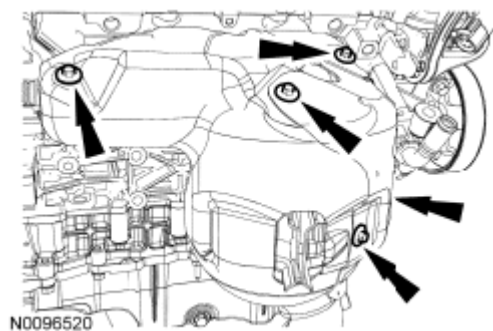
Locating RH Exhaust Heat Shield & Bolts
